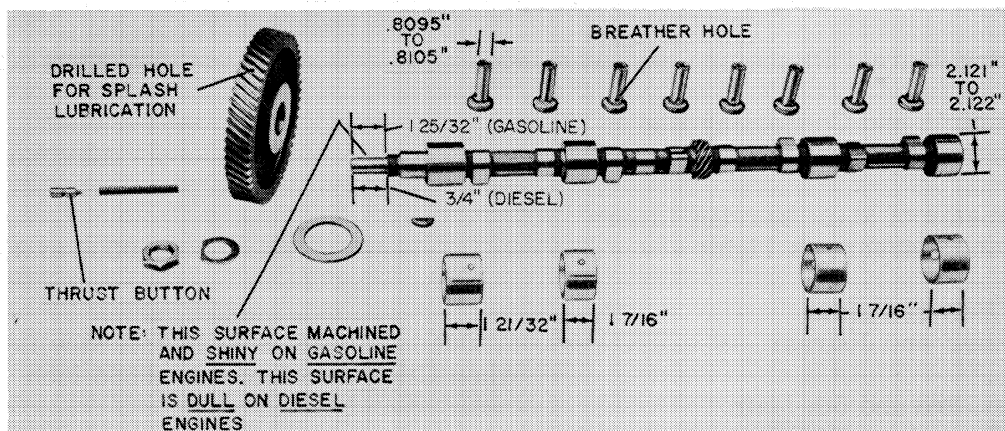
Camshaft, Camshaft Bushings and Valve Push Rod Lifters , A267 (6456A Camshaft Only)
